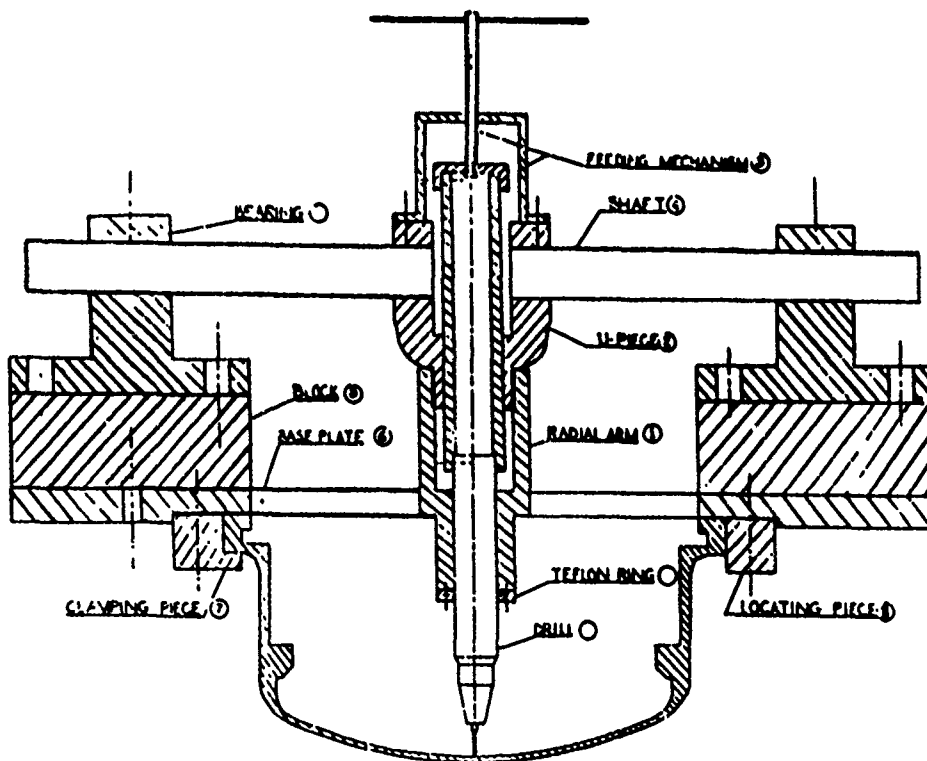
Hole Drilling Fixture for Residual Stress Measurements.
